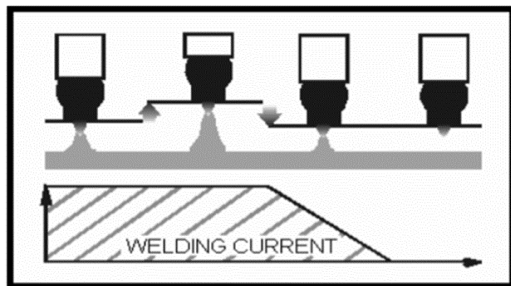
Shows how you can lift the torch from the work piece to start the slope down process and end welding.
